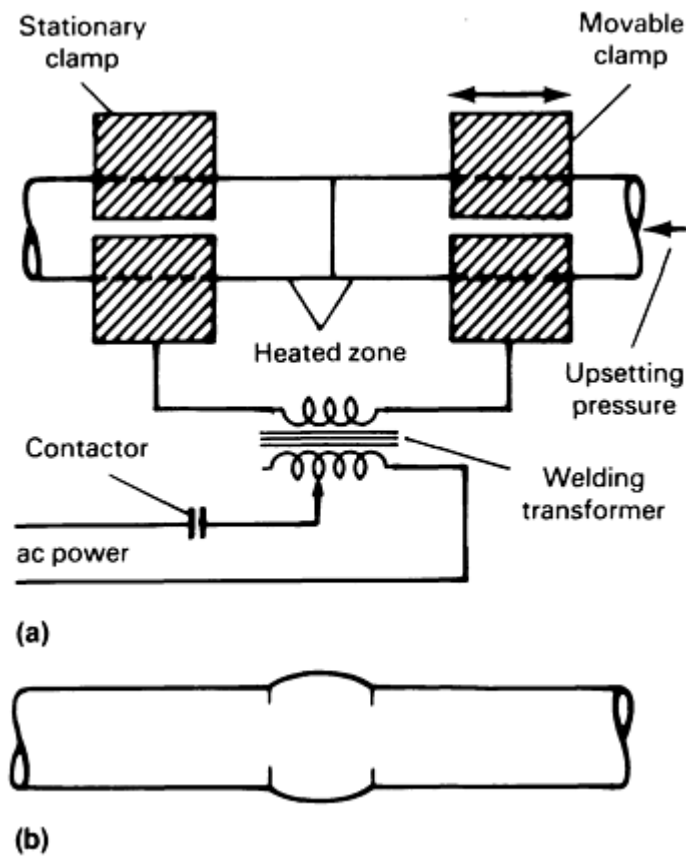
WELD OBTAINED WHEN USING THE UPSET WELDING PROCESS. (A) WORKPIECES SECURELY CLAMPED IN CURRENT-CARRYING DIES WHILE PRESSURE AND CURRENT ARE APPLIED. (B) FINISHED WELD PRODUCED AFTER WELDING OPERATION IS COMPLETED
